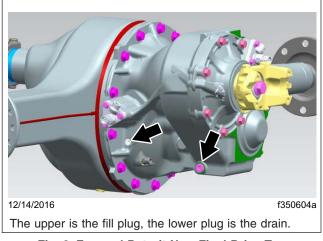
, Forward Detroit New Final Drive Top Performance Axles with ALM — Oil Check and Fill Location
